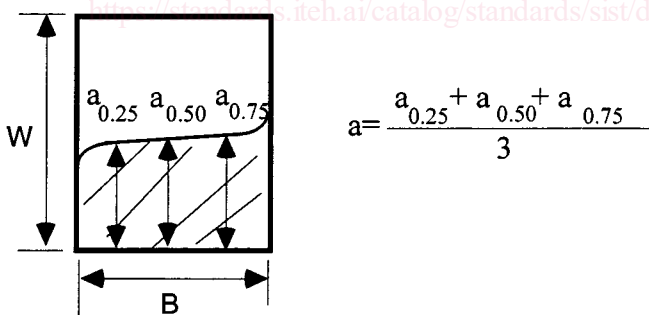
Cross Section of a pb Specimen Showing the Precrack Configuration ($a_{0.25}$, $a_{0.50}$, $a_{0.75}$ are the Points for Crack Length Measurements)
